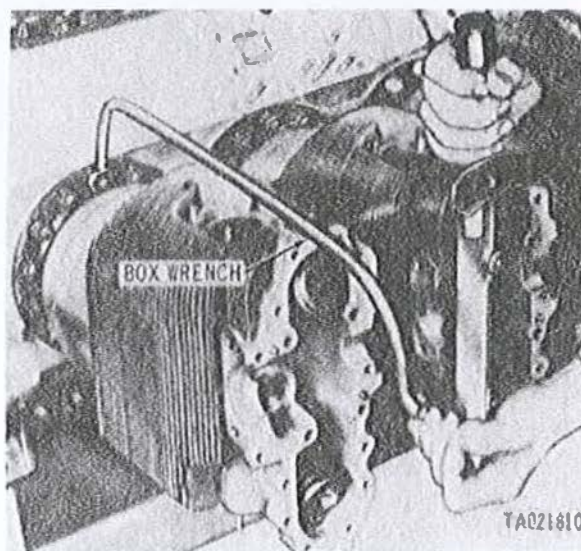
Checking breaking torque of cylinder base nuts using box wrench.
